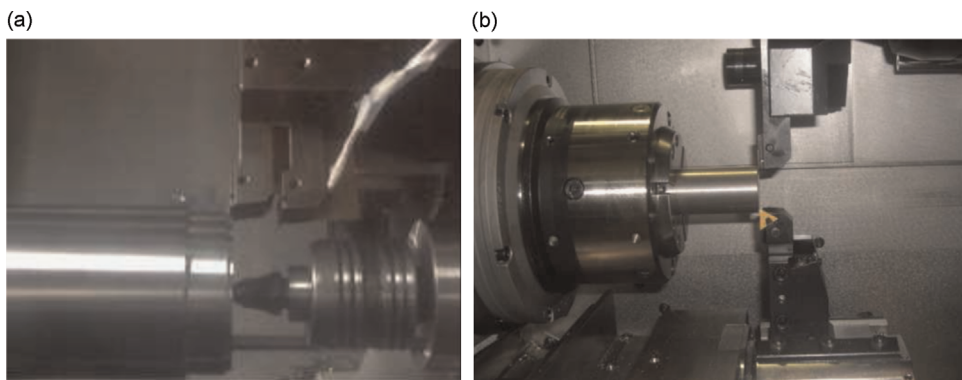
Parallel turning cases: (a) two turning tools on same turret and (b) two turning tools on different turrets.
